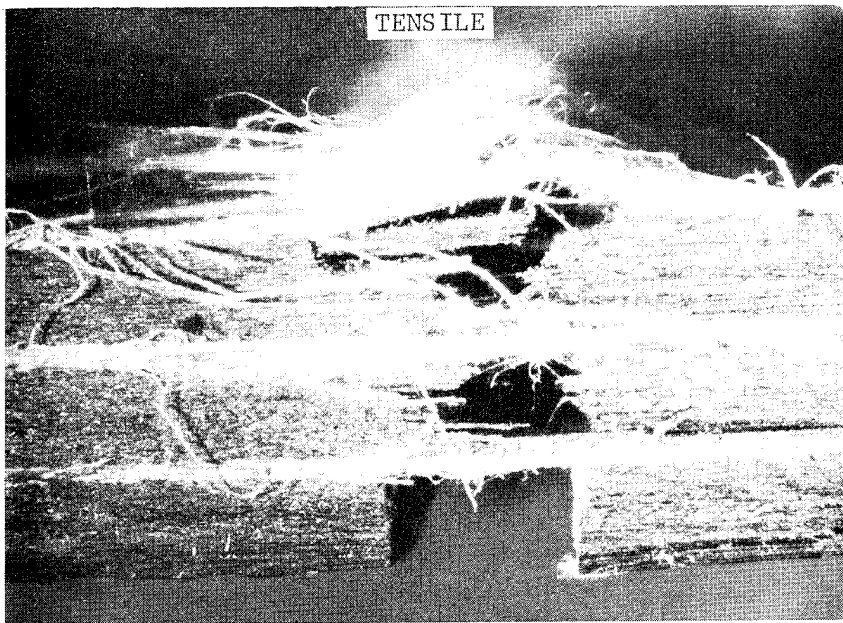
18X EDGE-VIEW OF IMPACT FRACTURE AREA OF PANEL #20 THORNEL 400/PRD-49
